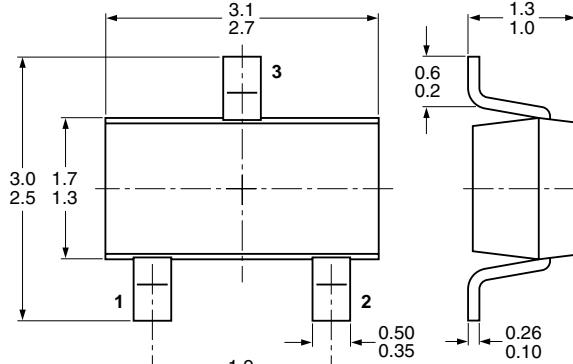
Package outline SOT346 (SC-59A/TO-236)
